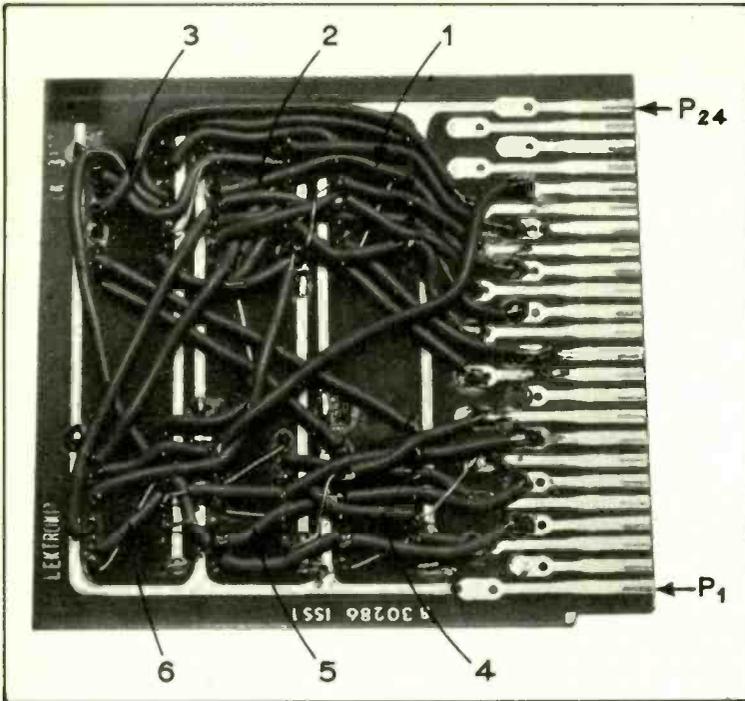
The circuit side of one of the component boards. This is in fact board 7 which has less wiring than most of the other boards.
